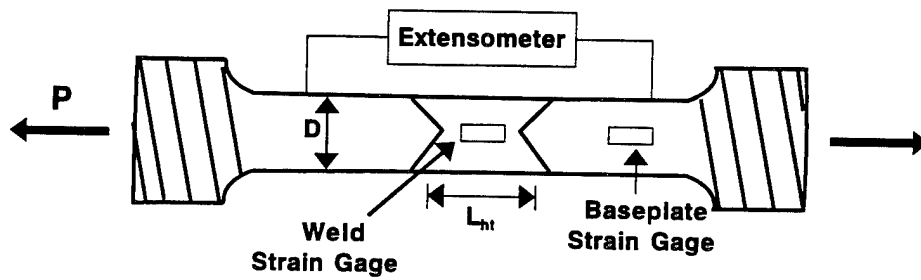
Weldment tensile specimen and instrumentation.
